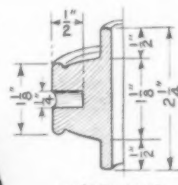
shows a mortise, $\frac{1}{4}$ by 1 in., in each spindle support, receiving a sole-leather spindle bearing. One leather is pierced with a $\frac{3}{8}$ -in. hole, while the other, carrying the tapered end of the spindle, is $\frac{3}{16}$ in. Glue these in. Turn the tapers to such a diameter that the lower ends, solidly seated, project $\frac{1}{4}$ in. below the crossarm. Fig. 7 illustrates the distaff support. Four and one-eighth inches from the lower end, a $\frac{1}{2}$ -in. hole, 1 in. deep, carries the distaff crossarm, also detailed in Fig. 7. A $\frac{1}{2}$ -in. hole, 1 in. deep, centered on the cylindrical part of the crossarm, receives the distaff.
